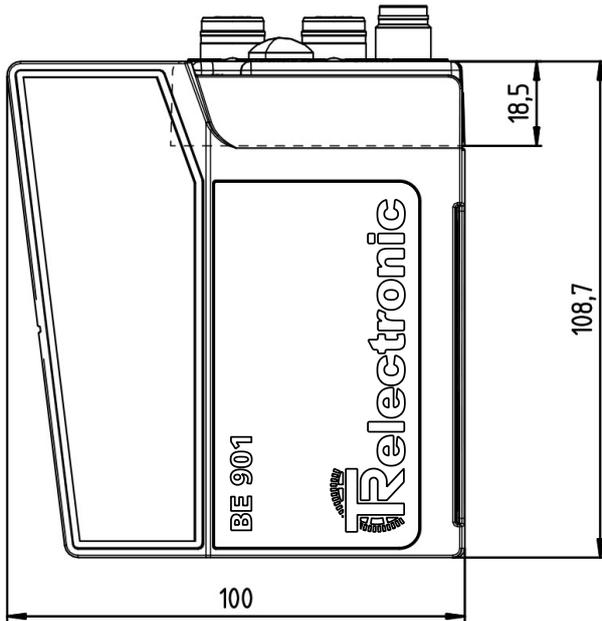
Dimension drawing BE 901 SSI with BE 901 MS SSI connection hood (all dimensions in mm)
